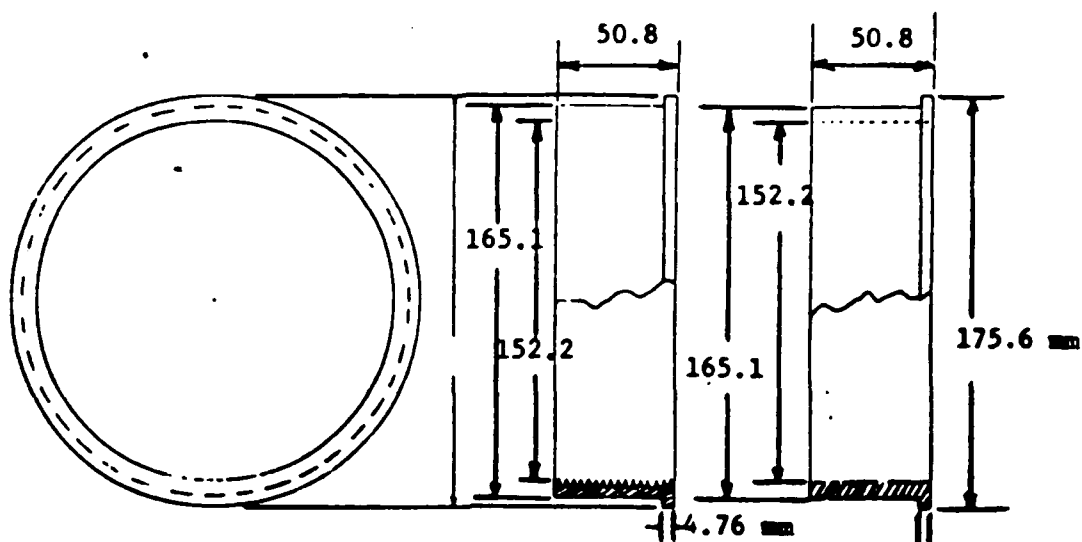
Smooth and labyrinth stator inserts for seal 2.
